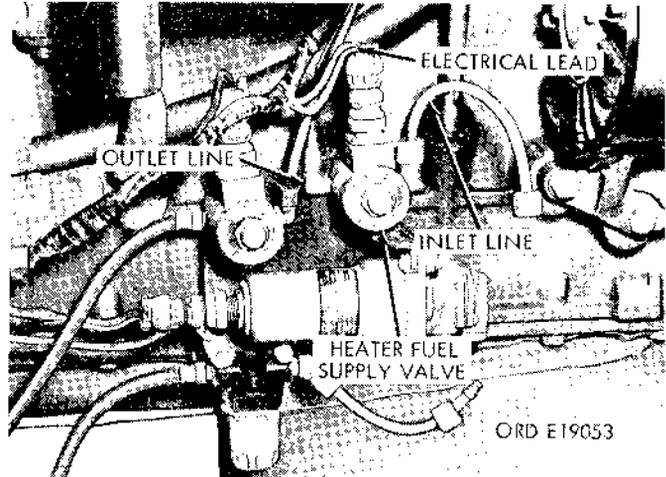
Manifold heater supply and fuel return valves—multifuel engine LDS 465-1.
